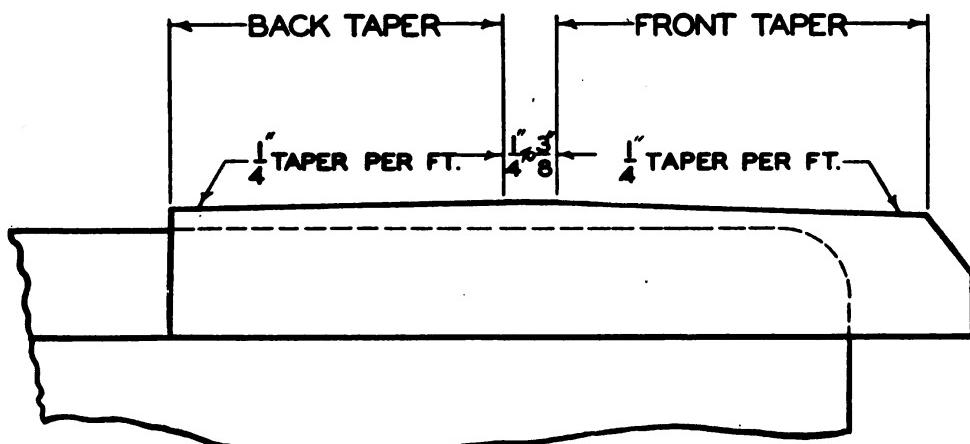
Schematic drawing of adjustable blade reamer.
